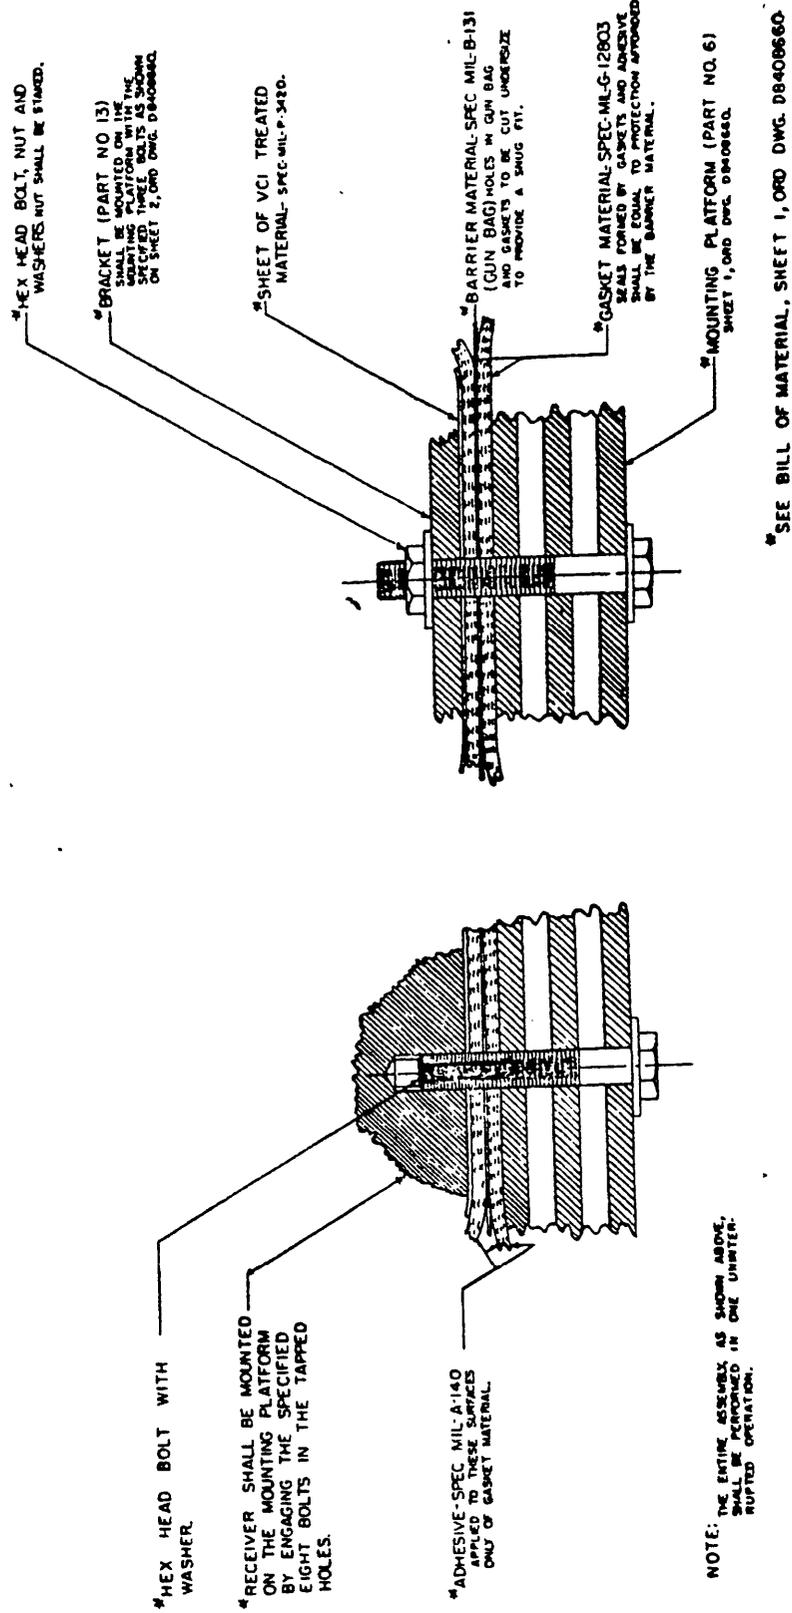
Assembly of gun bag, bracket and mounting platform.
